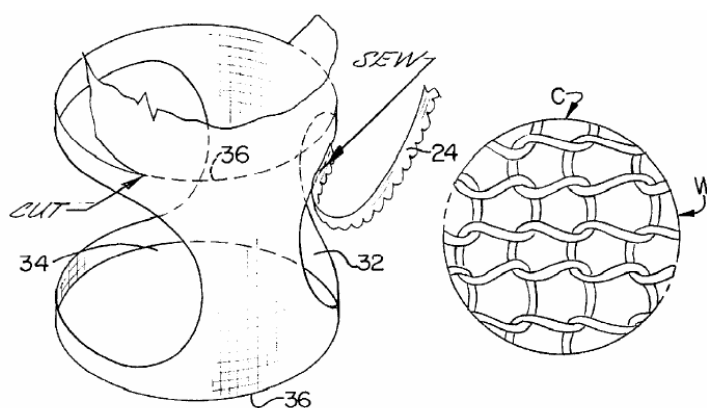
Front elevation view of the blank with enlarged sectional view (Osborne & Boomer, 1999)
